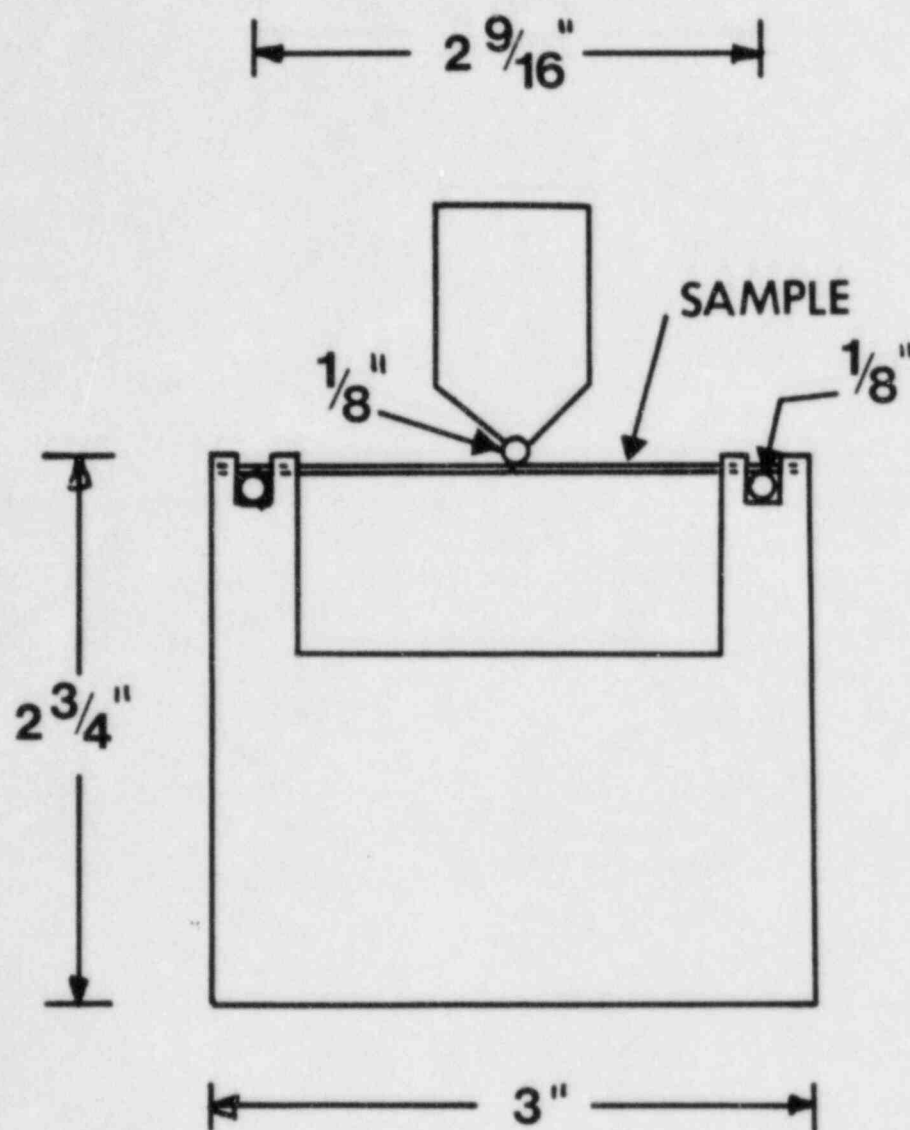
Sketch Showing the Configuration of the Bend Test Fixture.
